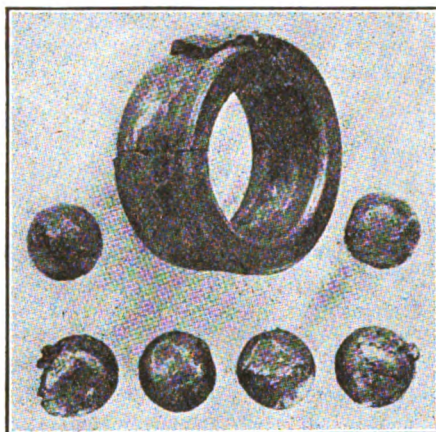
THIS INNER RACE AND BALLS WERE TAKEN FROM A BALL BEARING DESTROYED IN SERVICE BECAUSE OF CHIPS OR OTHER MATERIAL GETTING INTO THE BALL RACES. THE BALLS WERE BLUED BY THE RESULTING HEAT AND WELDED TO BROKEN PARTICLES, AS CAN BE SEEN.
